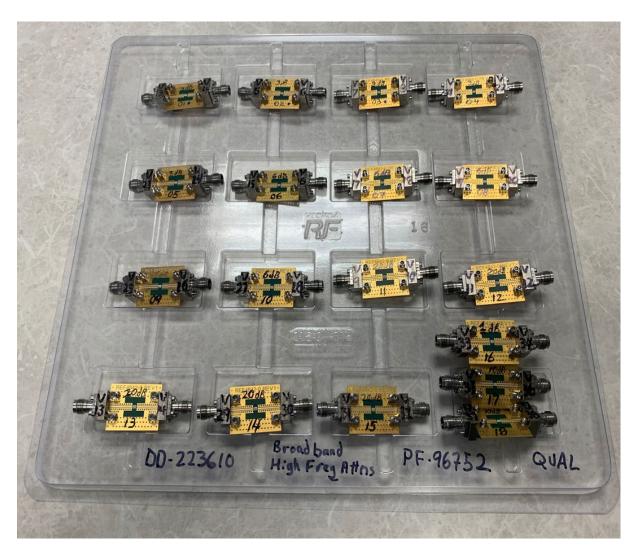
Group A inspection lot: test fixtures with the connectors installed
